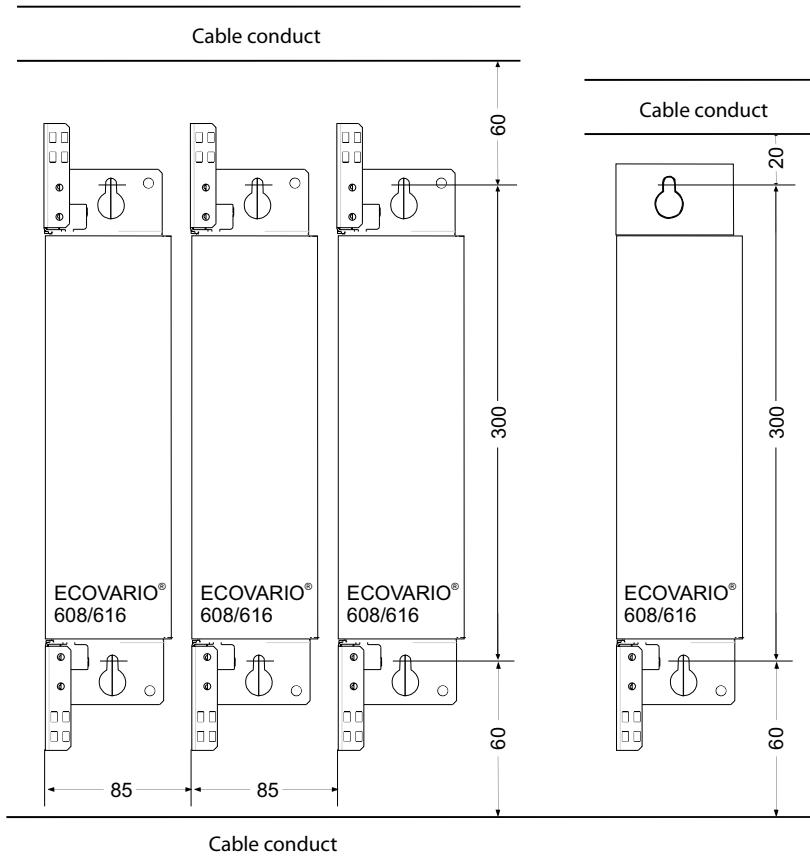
Mounting dimensions cabinet, width, minimum spacing [mm]
